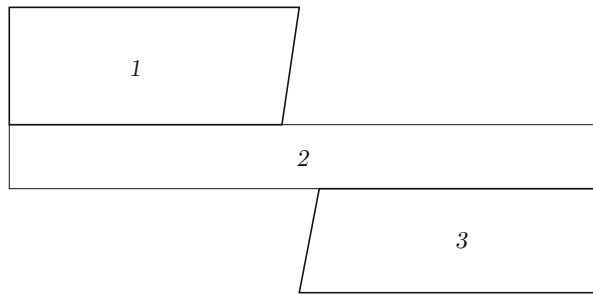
Diagram of shearing using bevel-edged blades: 1) moving blade; 2) metal plate; 3) fixed blade.
